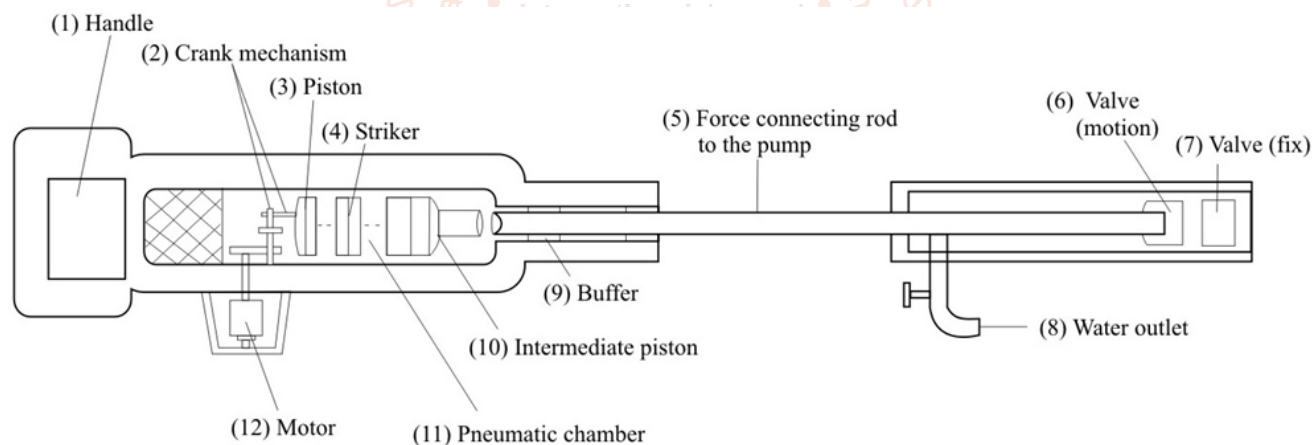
The schematic diagram of the assembled pneumatic pumping machine
